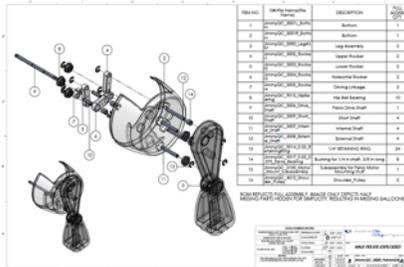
Mechanical drawing and parts list for JimmyQC’s unique hips
